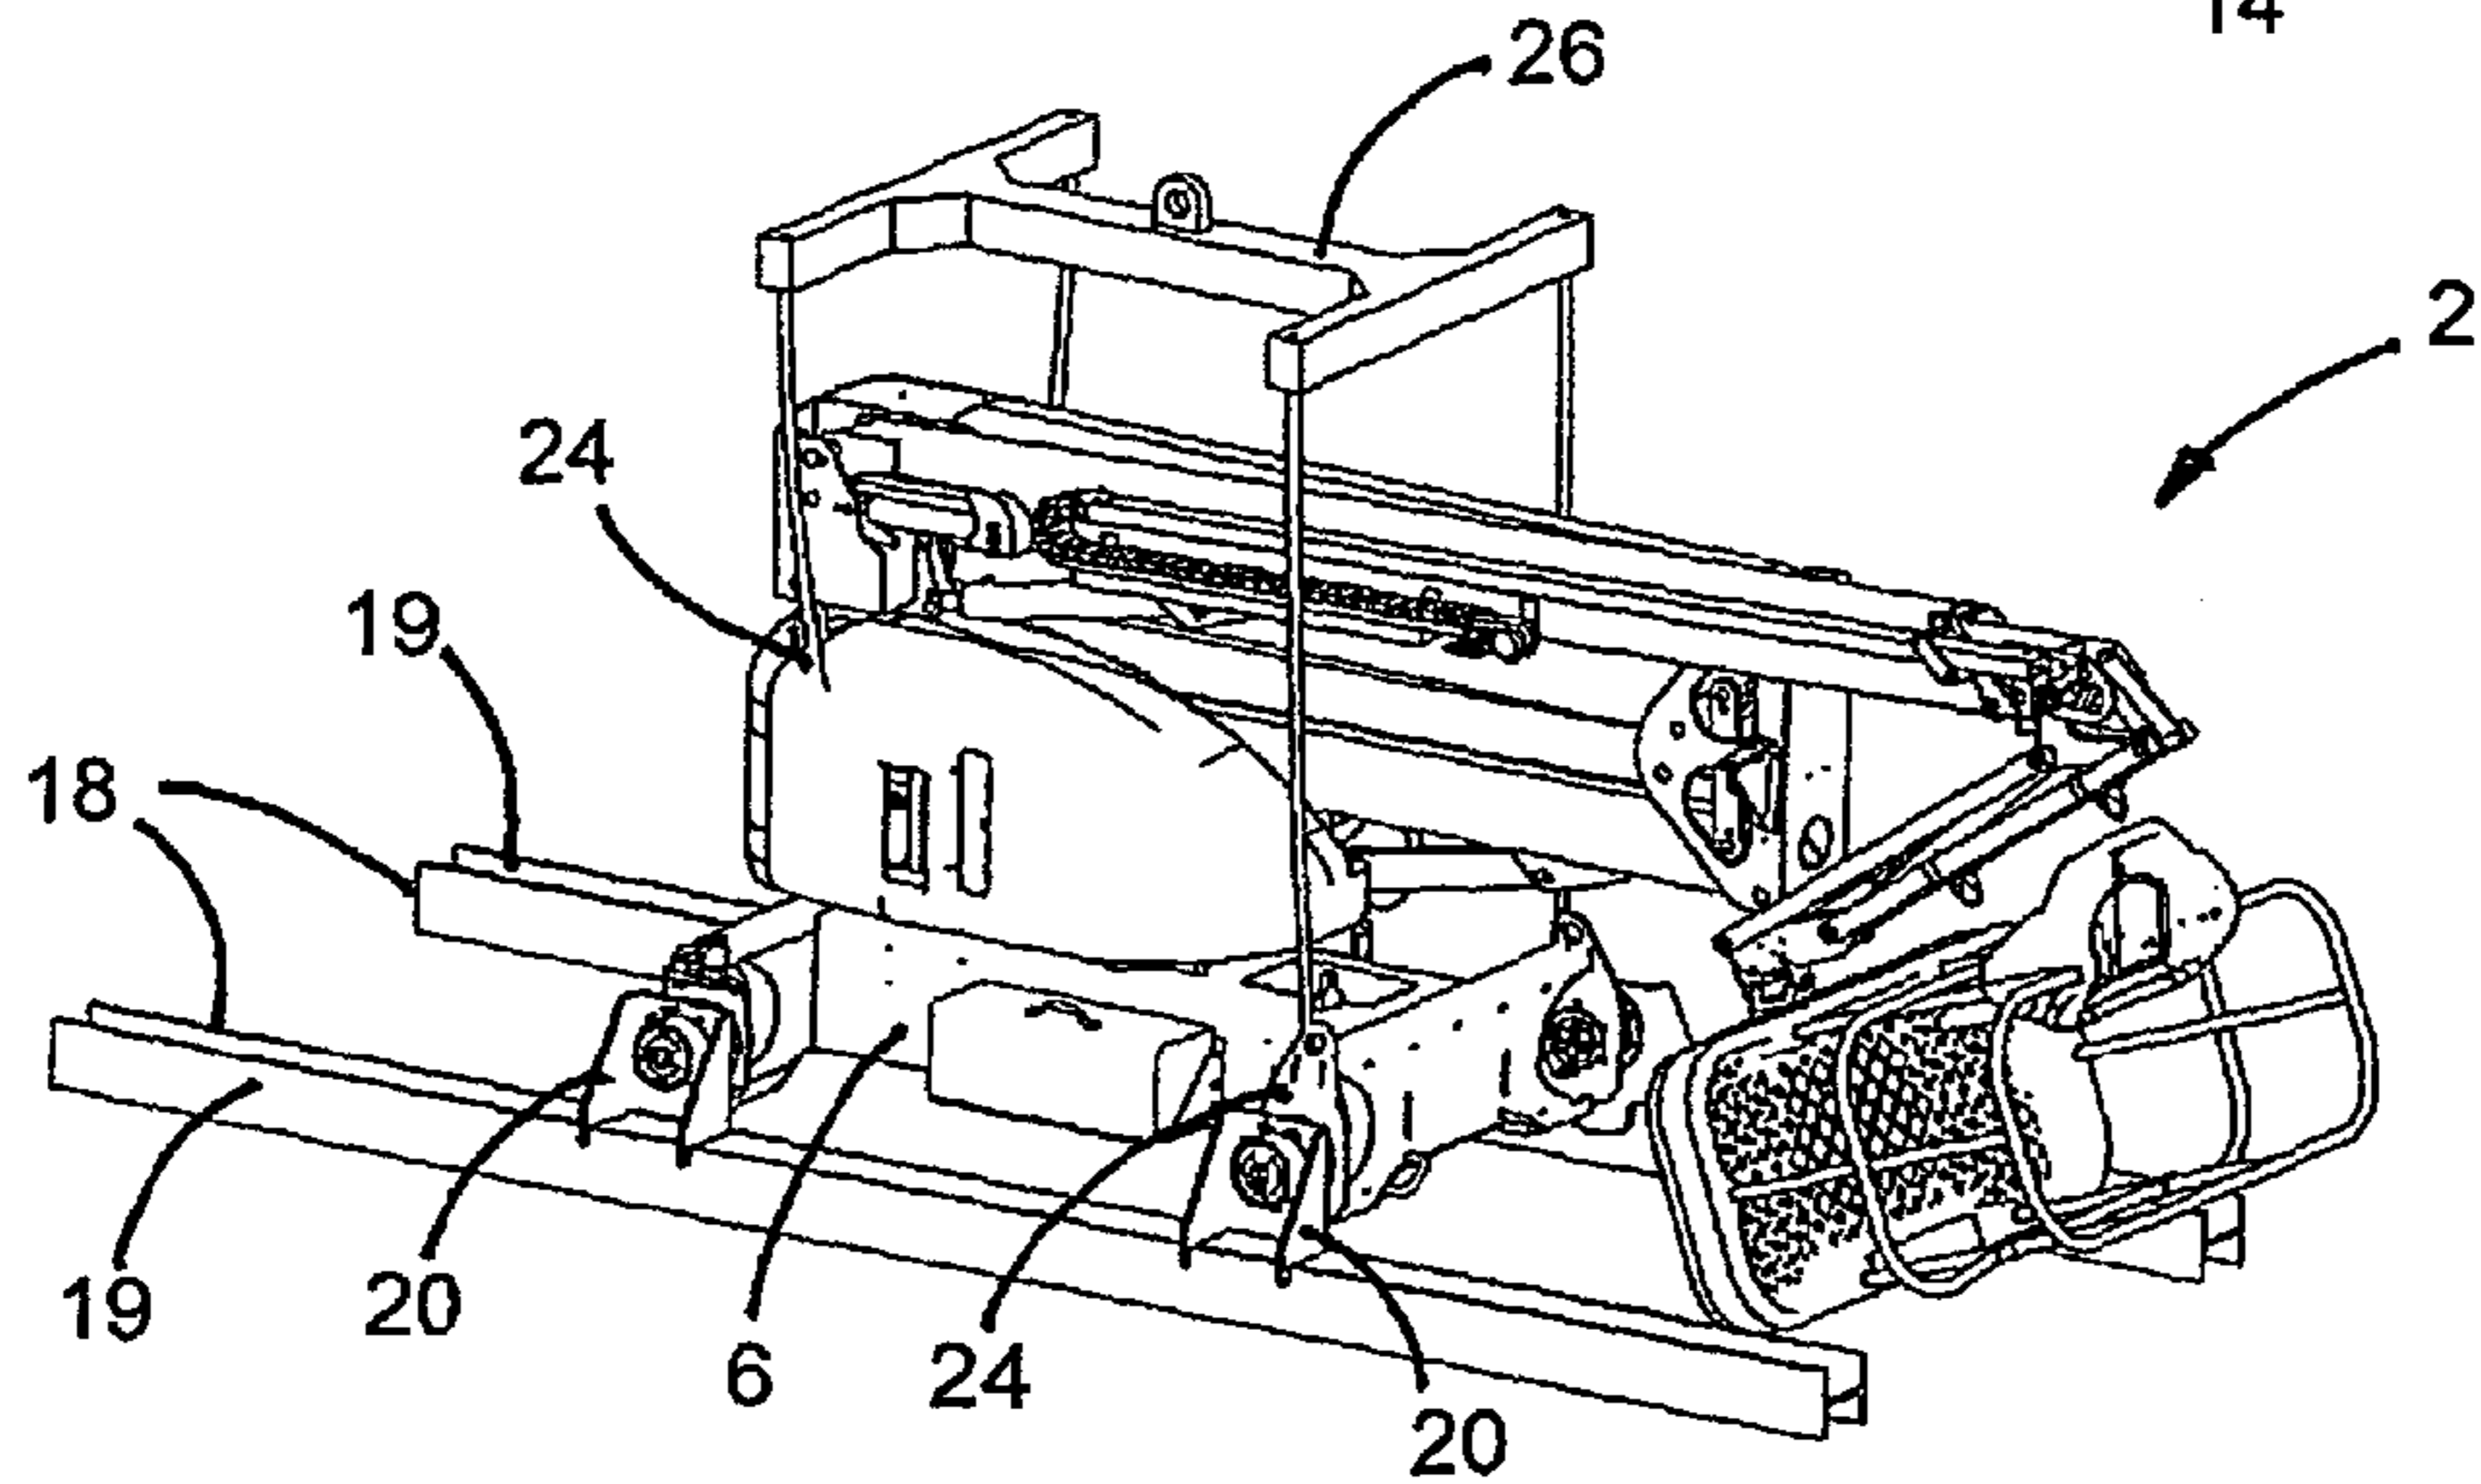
Showing skids mounted to both sides of the platform, fully converted.
